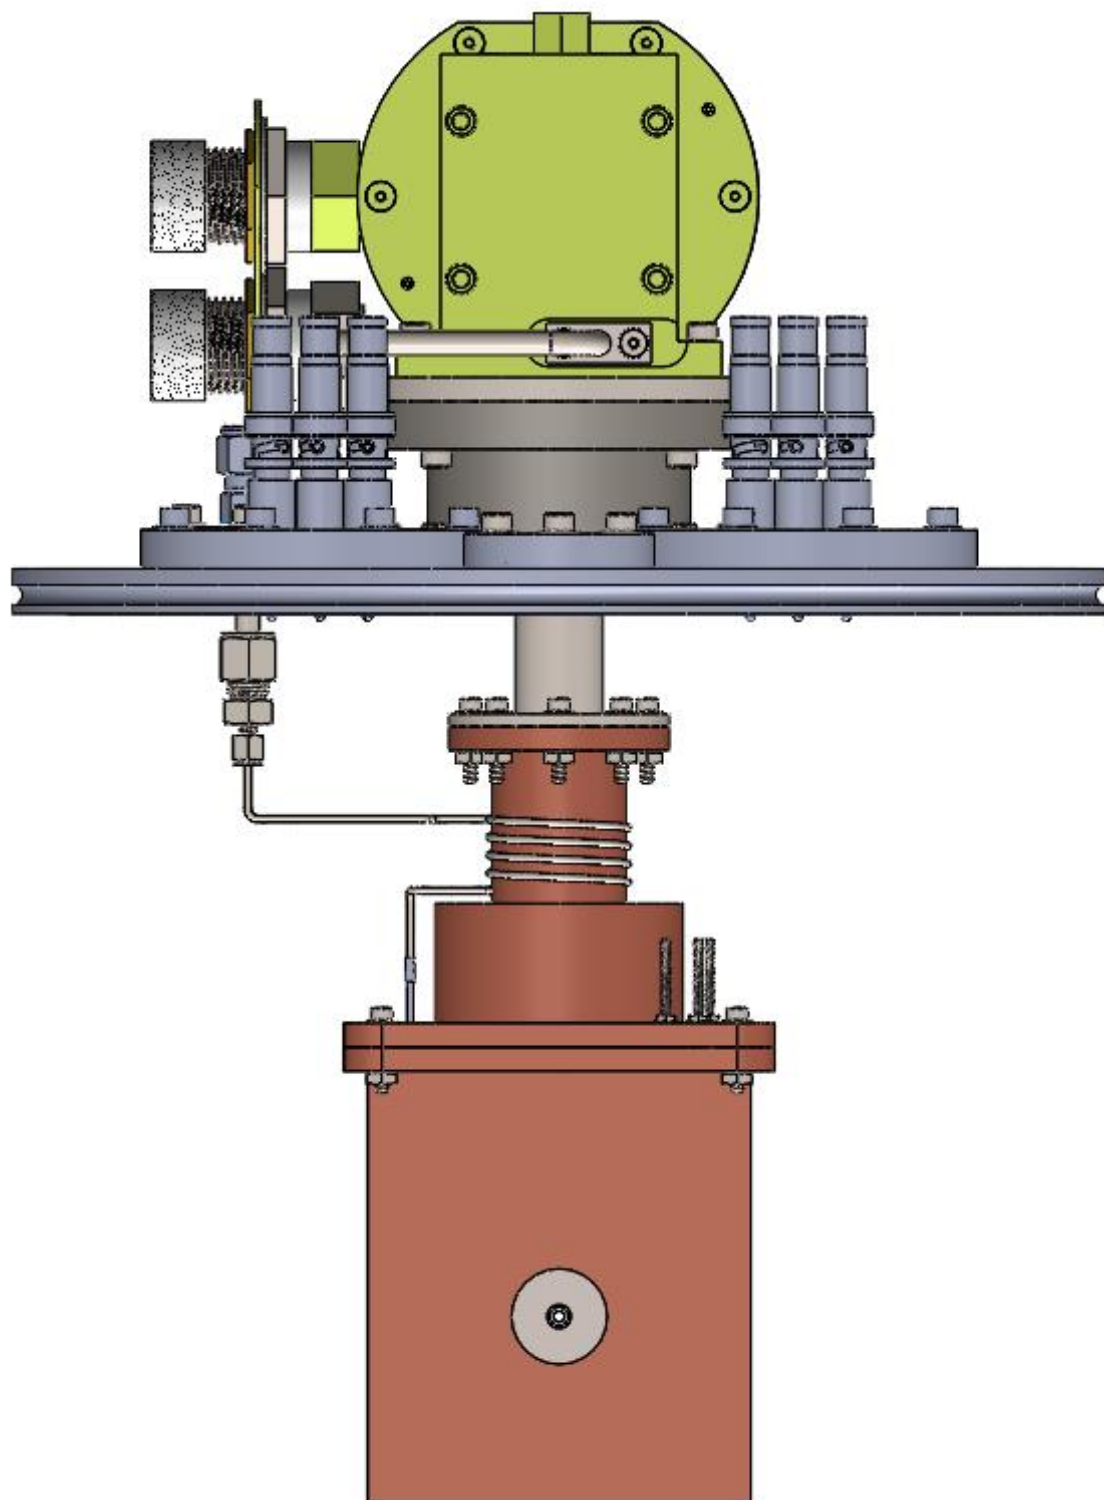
Front view of the QIT flange. Drawn to scale.
